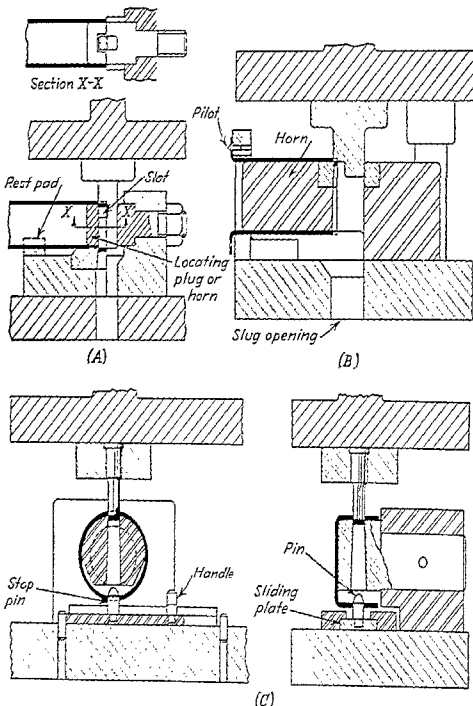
Horn die (A) cutting two opposed notches in one stroke with only one punch; (B) notching in relation to hole in flange; (C) with movable gage pin to locate second hole.^{4,7}
